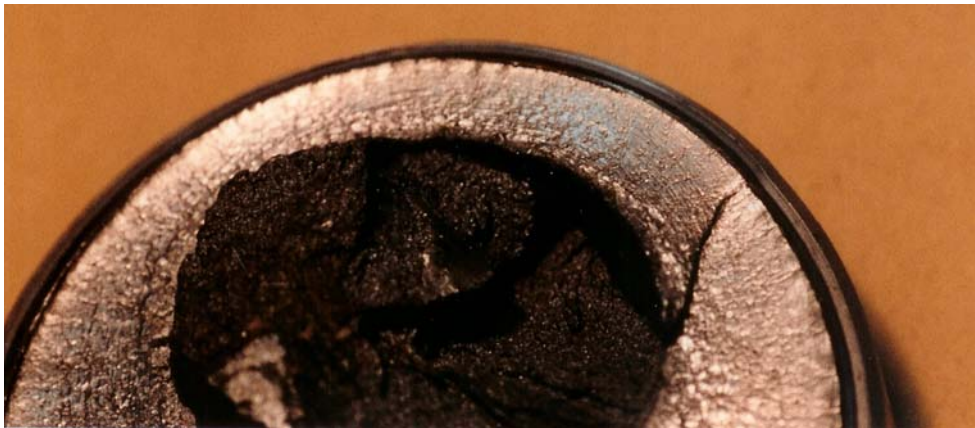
Failure at location "A". Beach marks are present on fractured surface.
